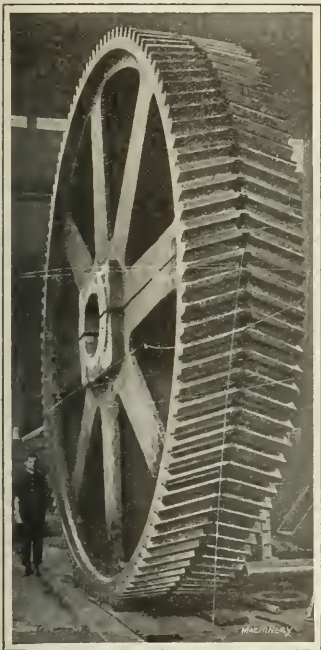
Large Herringbone Gear which had Teeth planed on Machine
